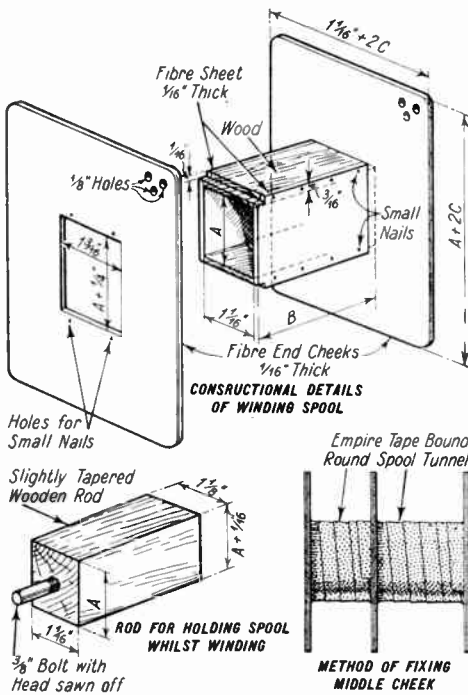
PARTICULARS OF THE WINDING SPOOL.
